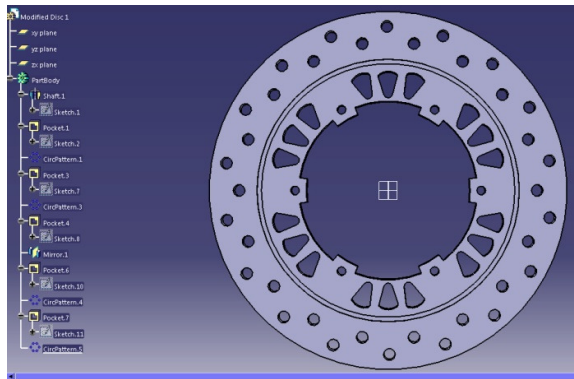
Modeling of Modified shape 1 disc brake rotor
